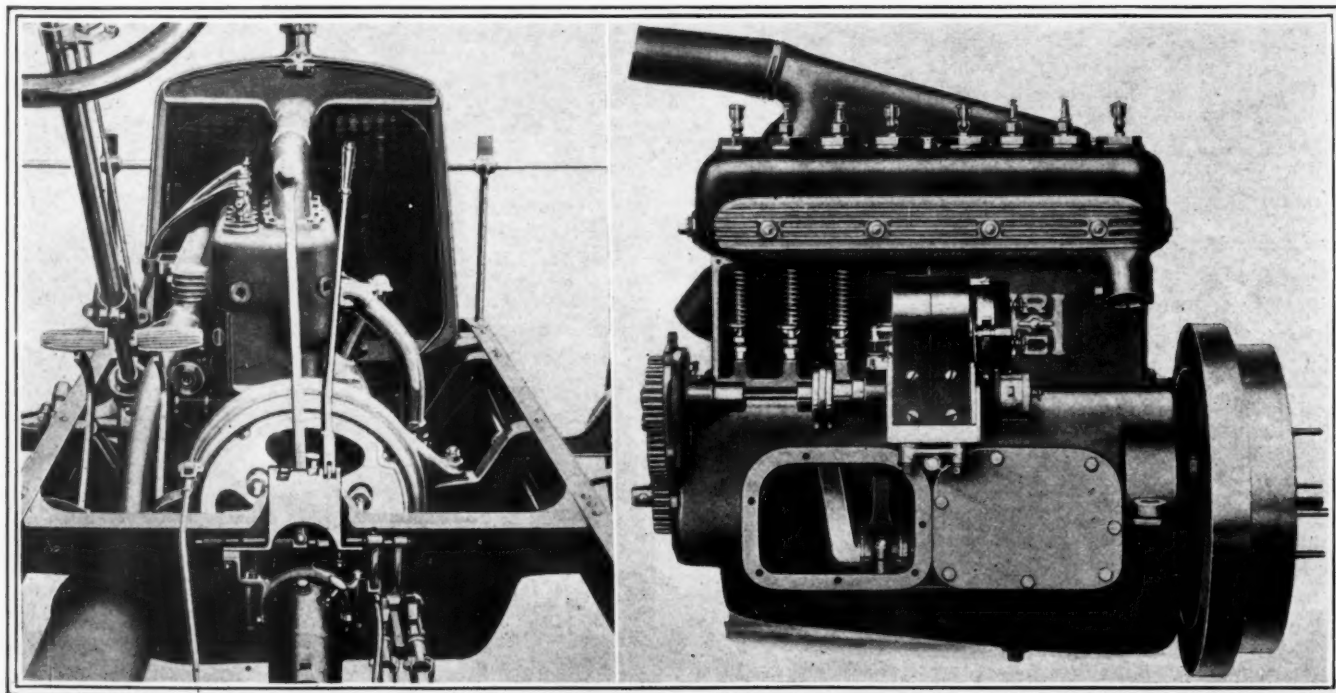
Mounting of control levers and rigid cross member supporting clutch; view of magneto side of motor
